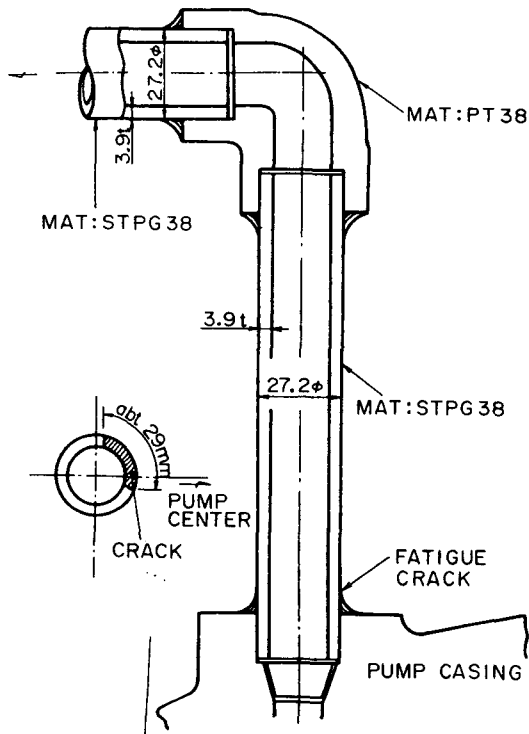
Fatigue crack occurred in high pressure condensate pump mechanical seal water line.
